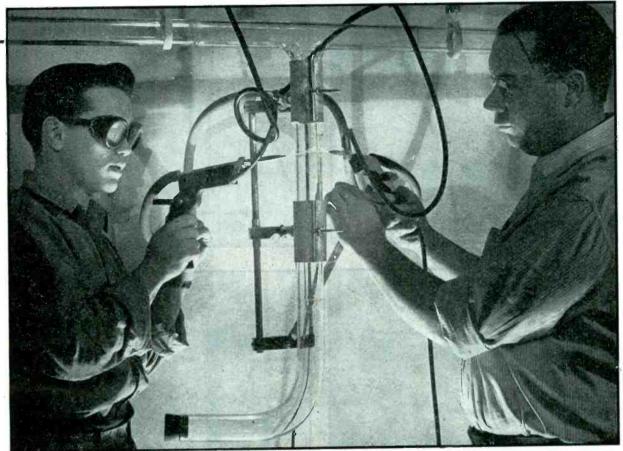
Conduction heating lends itself admirably to the high-frequency welding of glass tubing. Current is conducted to two guns used as a cross-fire arrangement by means of cables and clips. Pin-point gas flames projected by the guns perform three essential functions described in the text
